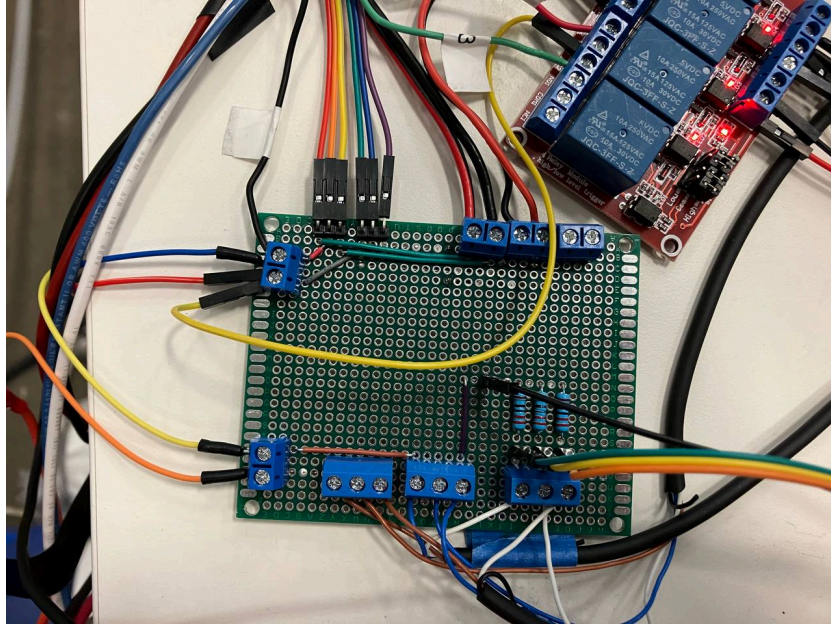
Soldered board to optimize electrical connections for valves and sensors
